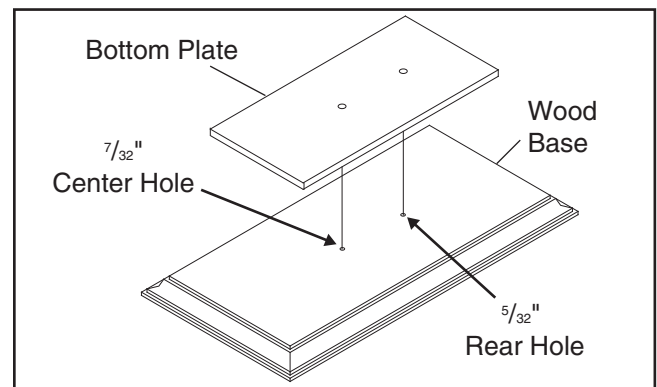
Bottom plate and wood base with location of holes to be drilled in the base.
